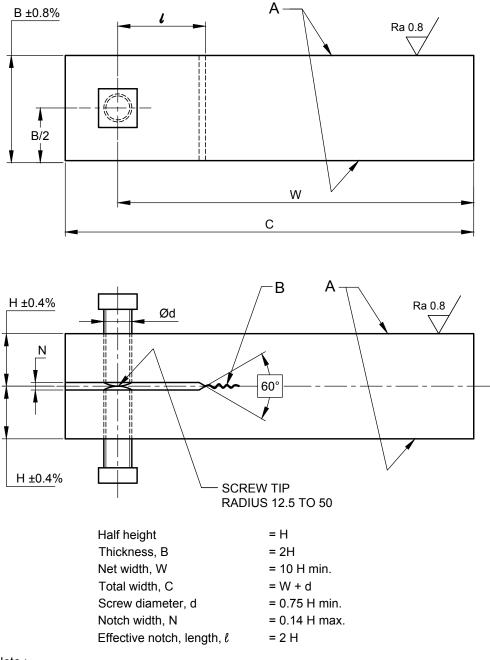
PROPORTIONAL DIMENSIONS AND TOLERANCES FOR COMPACT TENSILE TEST PIECE
